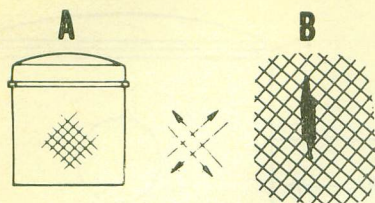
Refer to text for fitting piston to cylinder (A) and for removing material transferred to cylinder bore (B).
